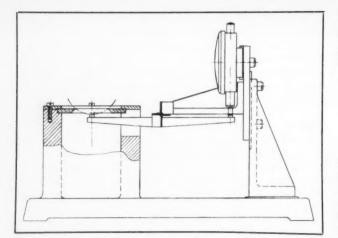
The gage mechanism shown in this sketch takes advantage of the hinge spring principle which offers a frictionproof, dirtproof and wearproof method of turning a corner.
